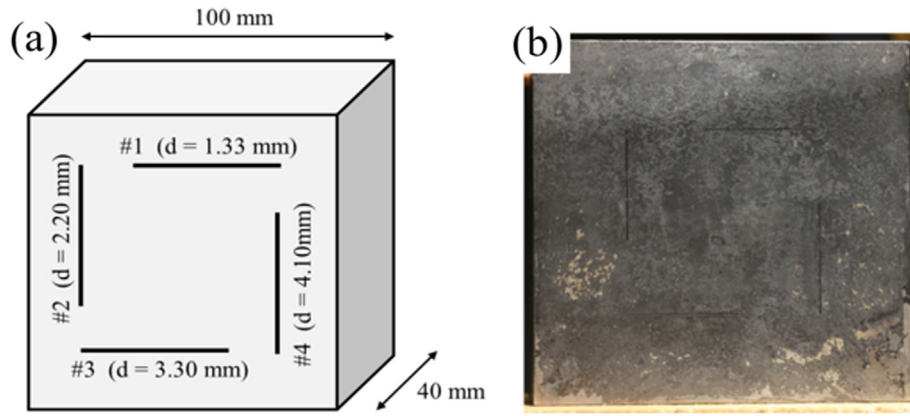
Specimen made of ST37 steel (All notches are 30 mm in length and 0.2 mm in width).
